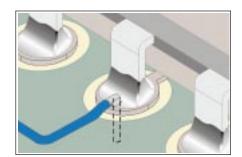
Acceptable* Wire soldered into plated-through hole, component side.
